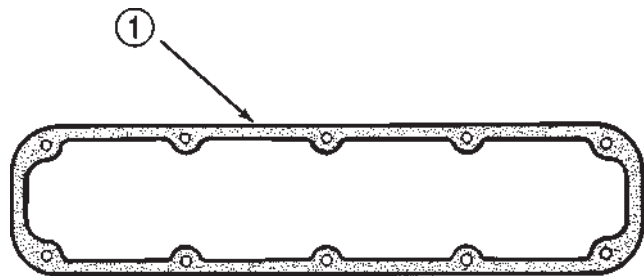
Cylinder Head Cover Gasket V-8 Gas Engines
